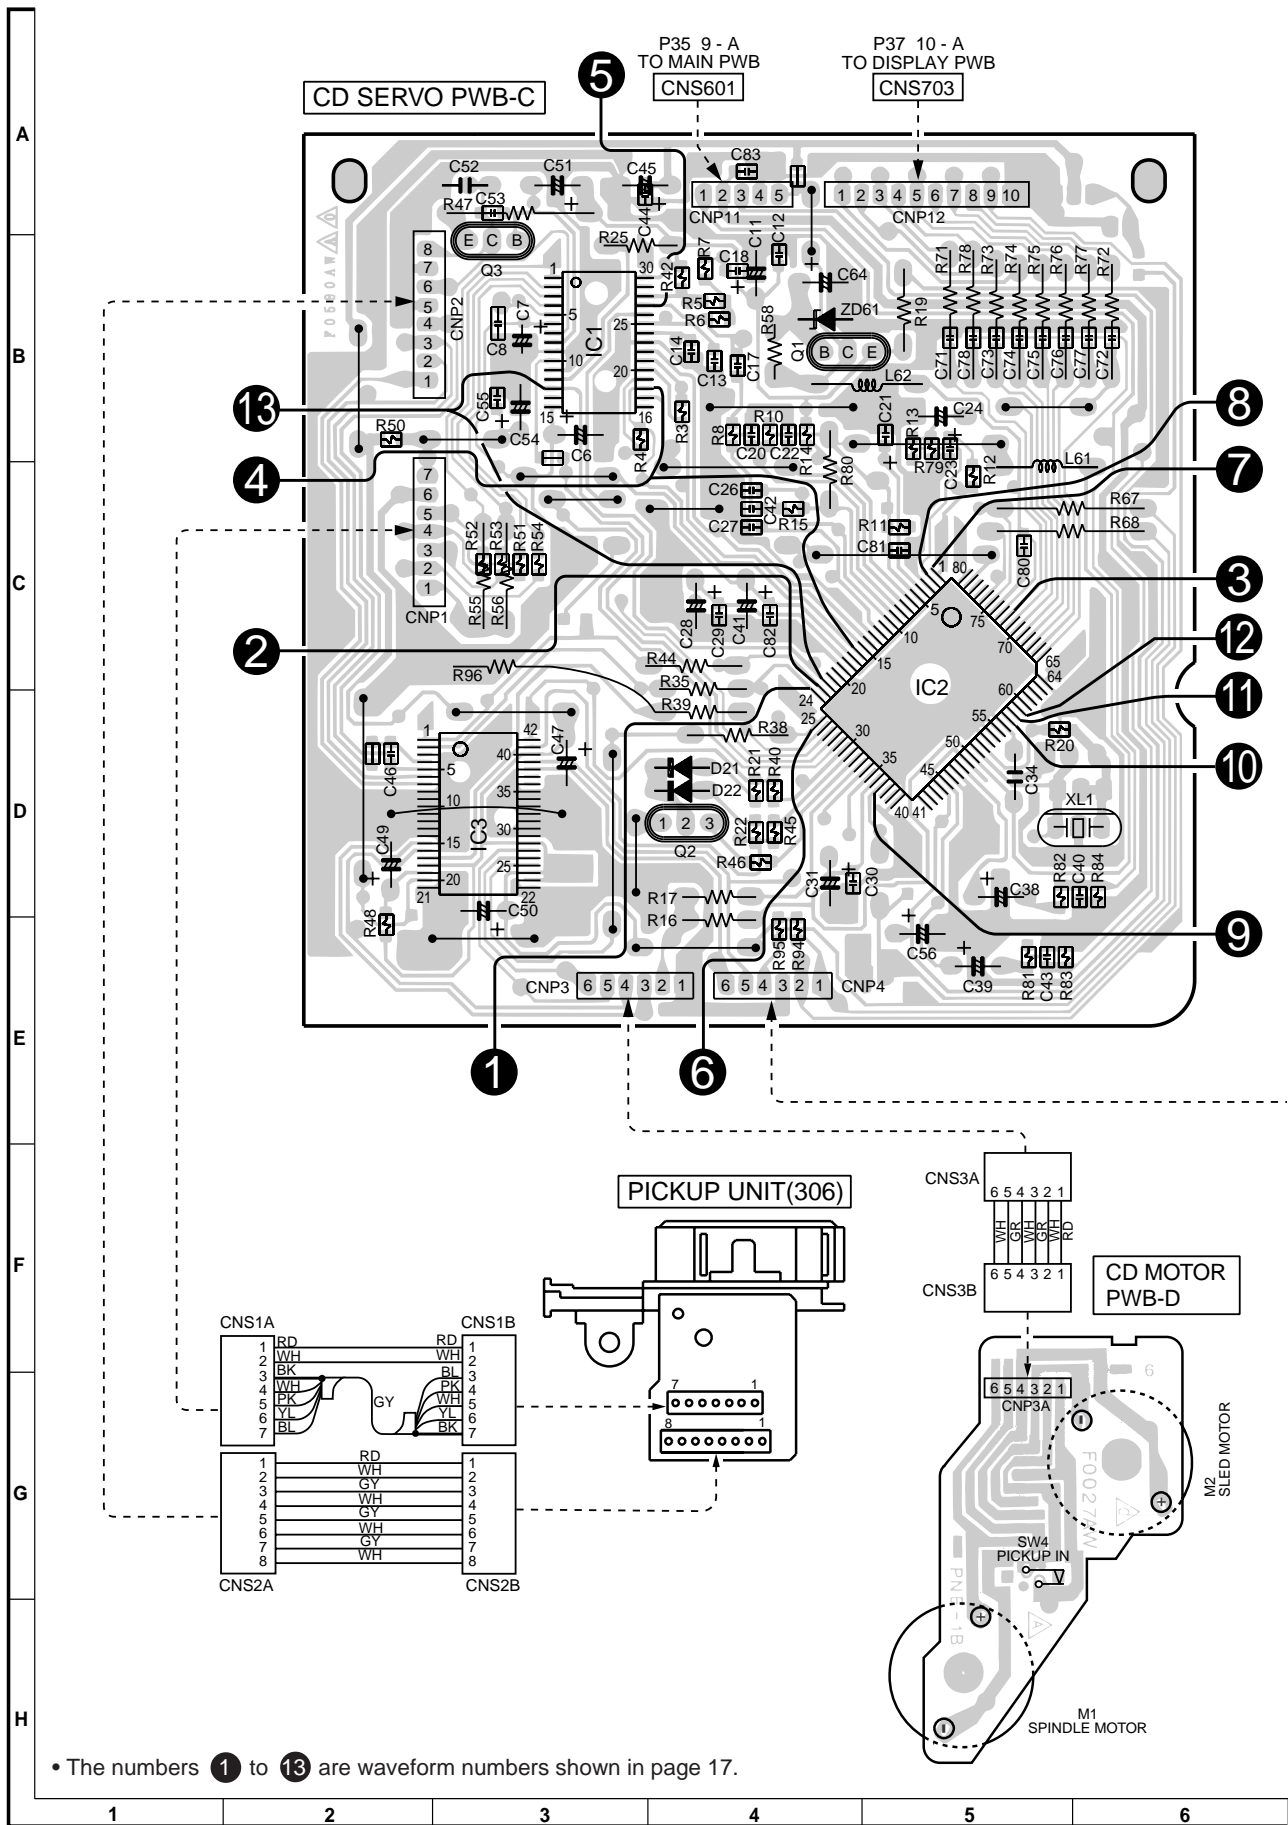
WIRING SIDE OF P.W.BOARD (7/9)
